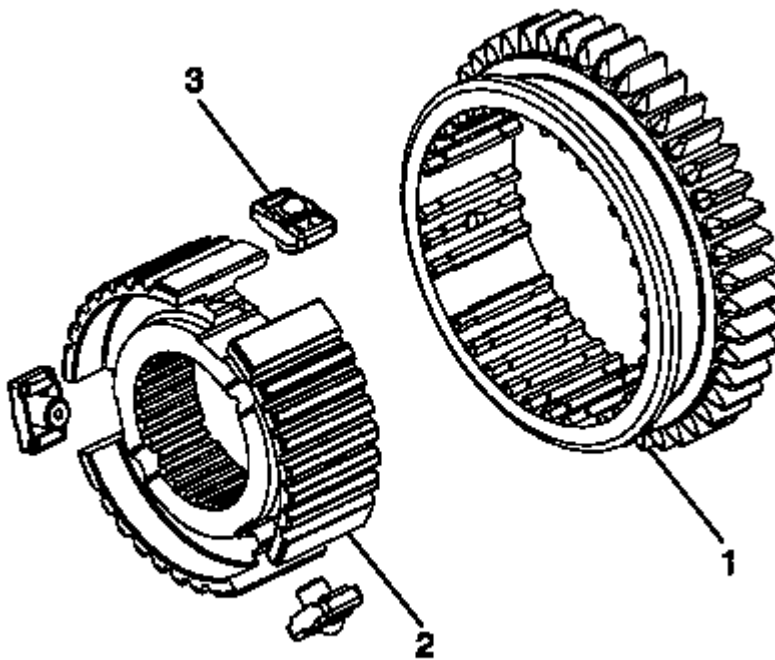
1st-2nd Gear Synchronizer Sleeve
